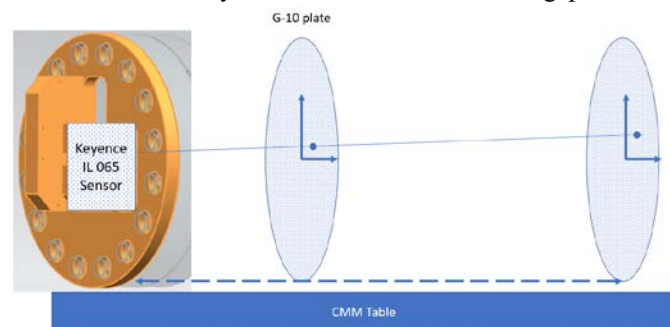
The calibration idea for the Keyence IL-065 laser path. On a CMM table the sensor plate gets mounted and surveyed. A moveable g-10 screen allows to track the laser path by varying the distance between the sensor mounting plate and the g-10 plate. Optical survey of the laser dot on the plate will establish the laser path in the CMM coordinate system.
